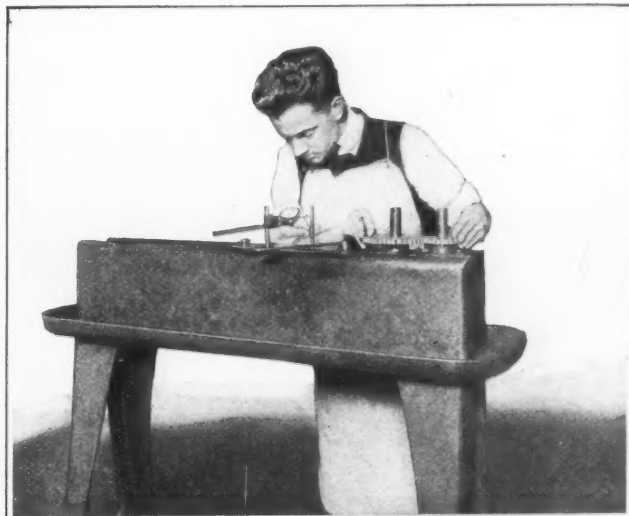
Brown & Sharpe Machine for testing Accuracy of Gears
